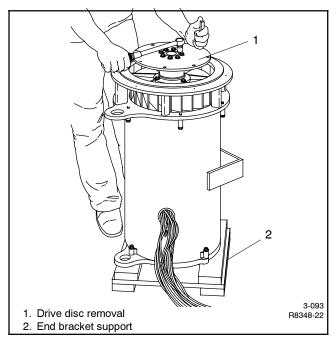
Alternator Support, Drive Disc, and Fan Removal
